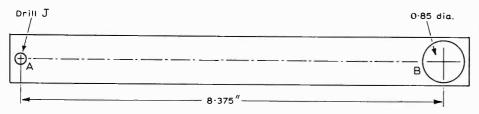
When turntable and pickup arm are assembled place hole A over spindle and hole B over pickup arm pillar. Draw round the base to mark selected position.
